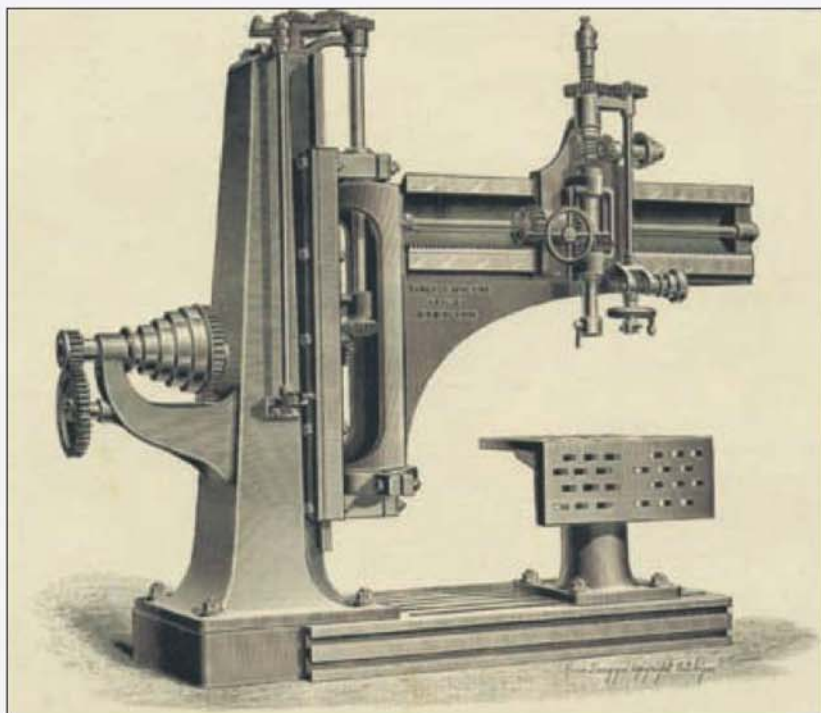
Radial Drilling Machine, one of several types made by Tangyes. This example is the large type which was double geared from a 5-step pulley.
